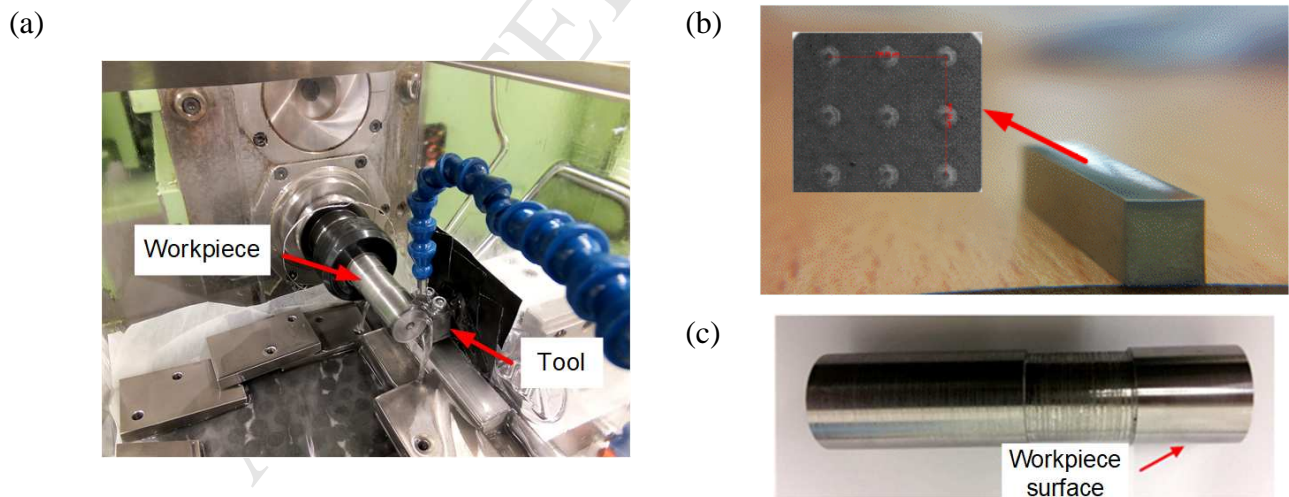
(a) In-house built testing workbench for abrasive machining processes; (b) WC-CoNi cemented carbide tool with LST processed hexagonal pyramid patterns, and (c) counterpart made of steel.
